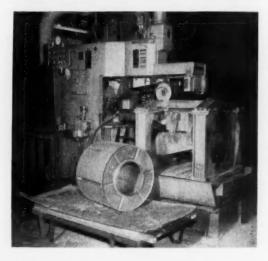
Dryer drum longitudinal seam welder.
